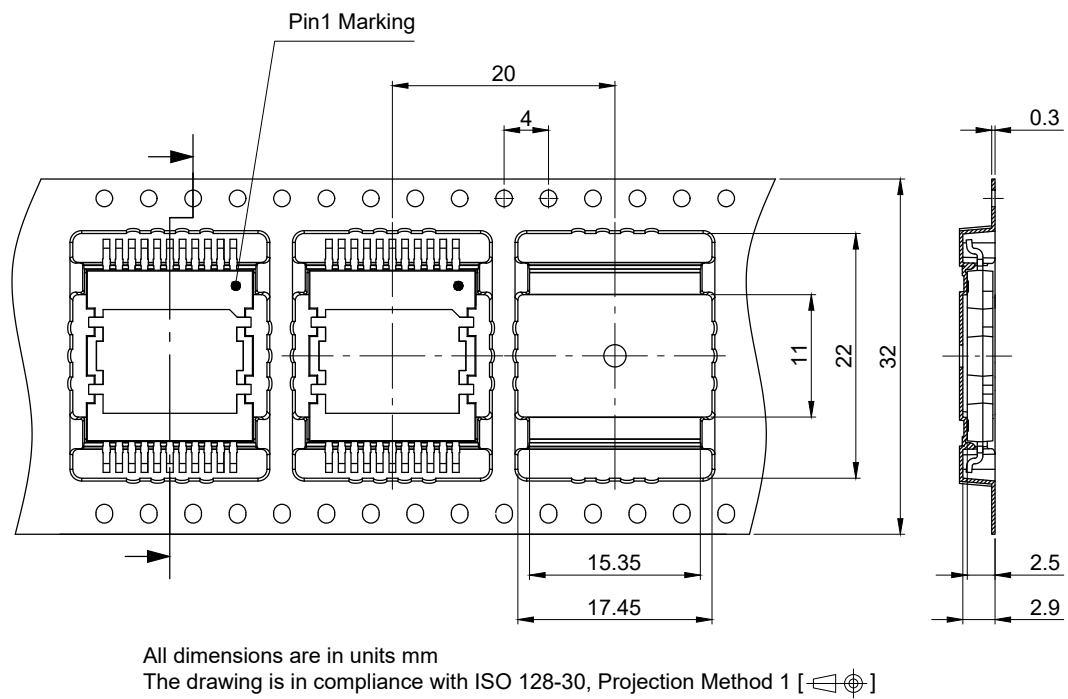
Packaging variant PG-HDSOP-22, dimensions in mm
